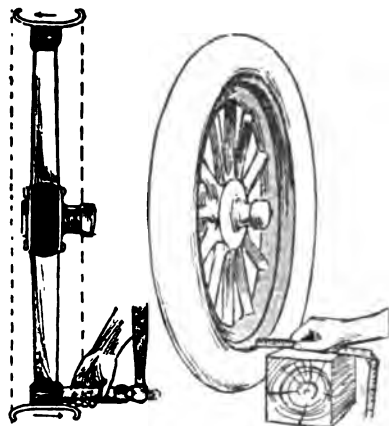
Truing up a wheel: If a wheel is suspected of being out of true, it may be tested as shown above. With one hand resting on a block to steady it and holding a rule, or the like, close to the wheel rim, the wheel is revolved very slowly; if it is untrue the space between the end of the rule and the wheel rim will vary. If the trouble is simply due to the rim having shifted on the felloe, it may be rectified as indicated at the left in the illustration.
